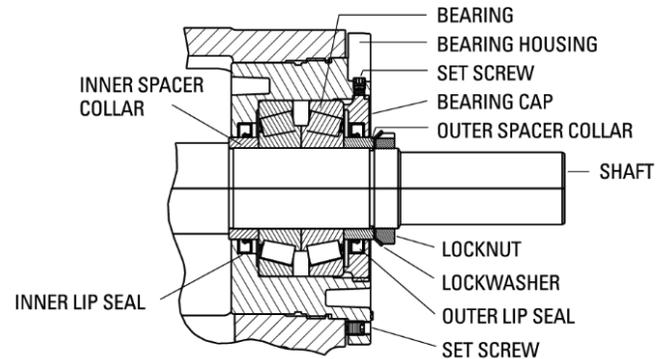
THROUGH G1-222 BEARING HOUSING ASSEMBLY
